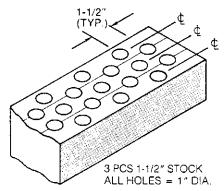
Construction details of an indexing device that will automatically position the workpiece regardless of hole spacing or radial distance.
